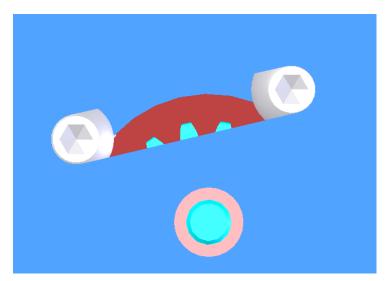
Slotted hole and hole for flange bearing of the shaft.
